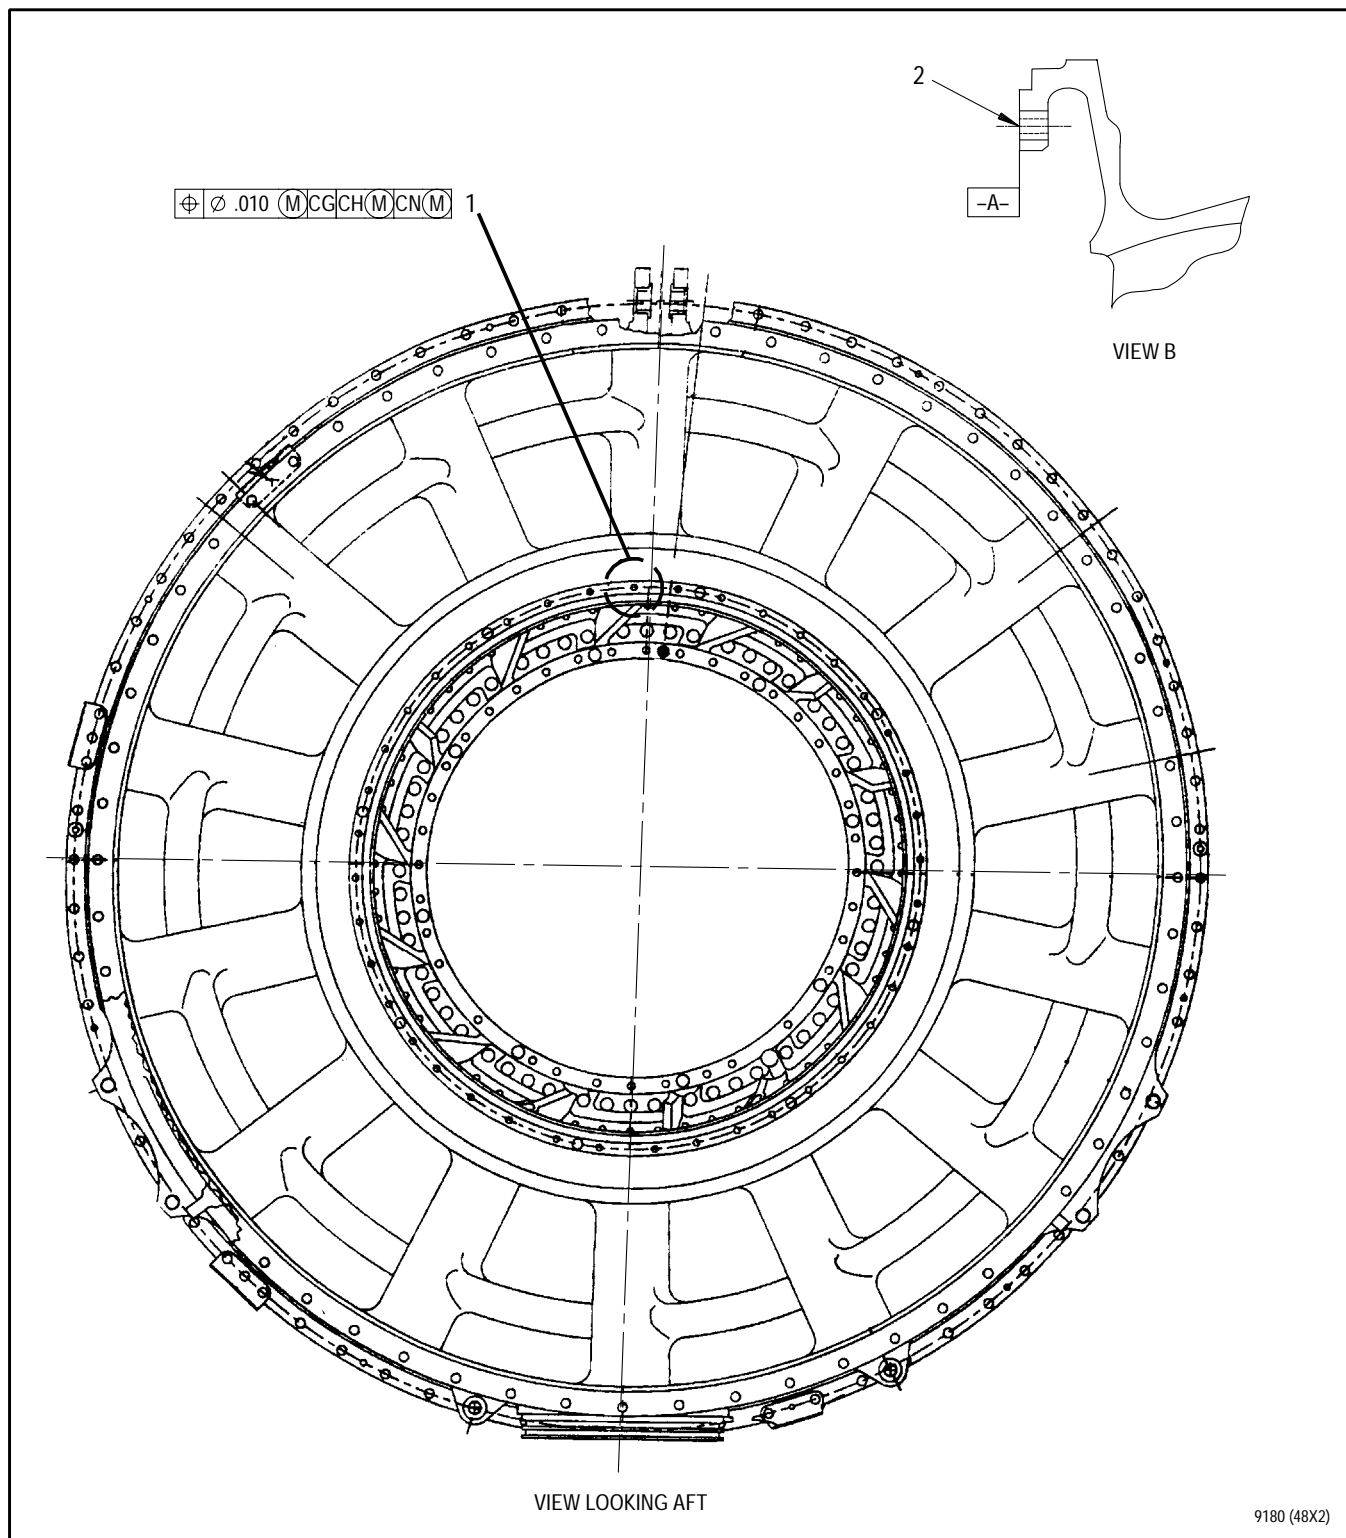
Compressor Intermediate Case Assembly - Inner Forward Flange Threaded Hole Repair
